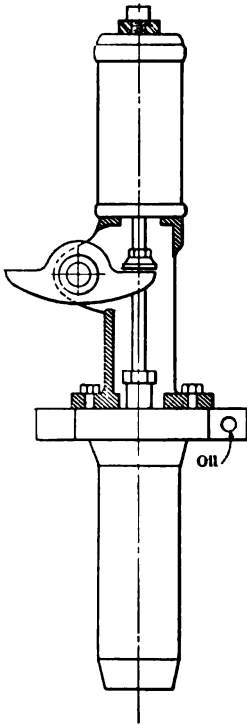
McIntosh & Seymour marine Diesel fuel injection valve.
